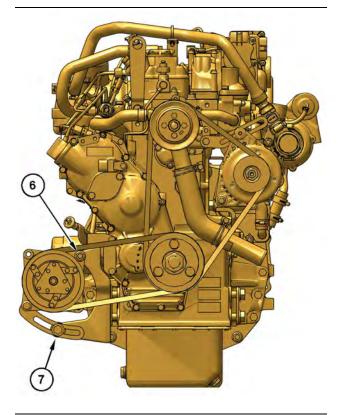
C2.2 (6) Mounting bolt (7) Adjusting bolt g06387511
